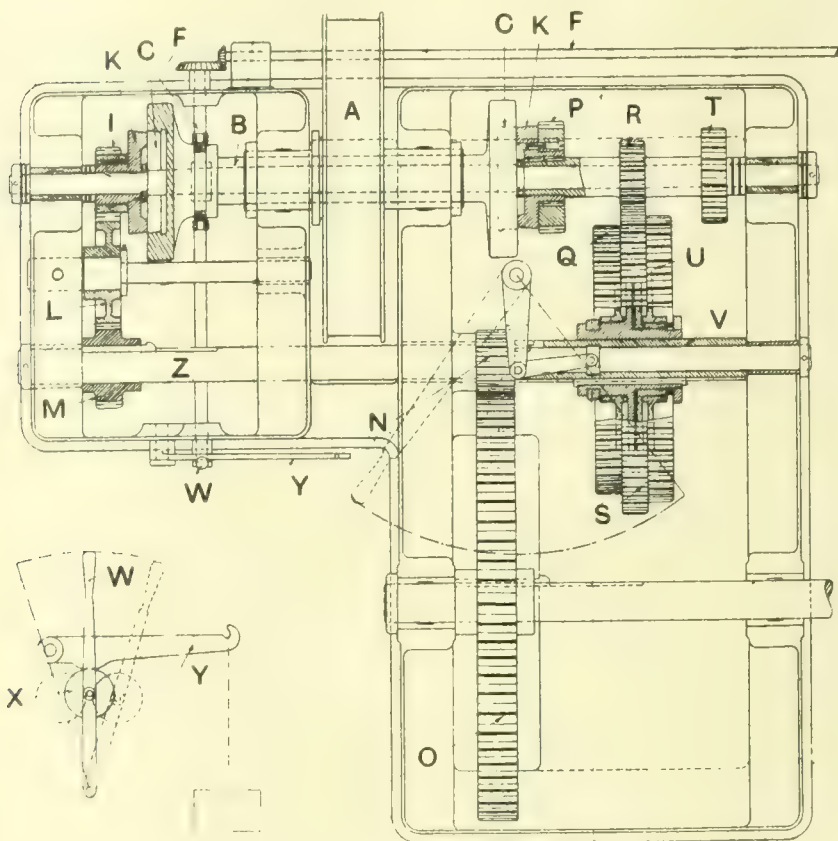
DRIVING AND REVERSING MECHANISM FOR PLANING MACHINES.
